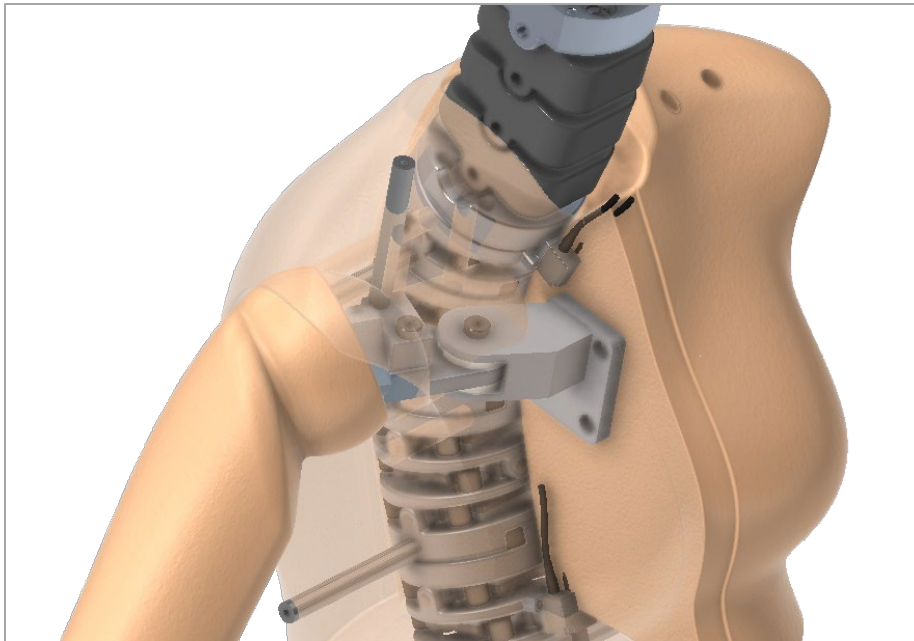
Shoulder concept II: Horizontal movement, fixed sternum.
